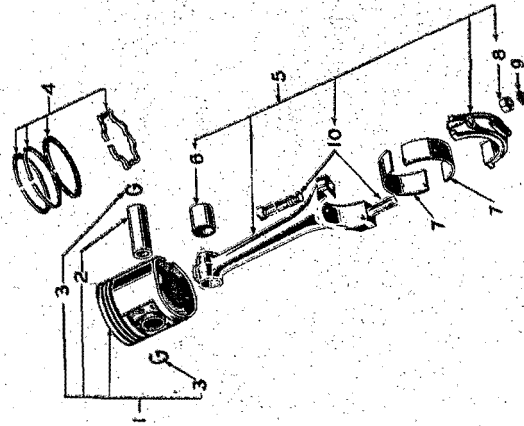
EXTERNAL VIEW, ENGINE PARTS GROUP
